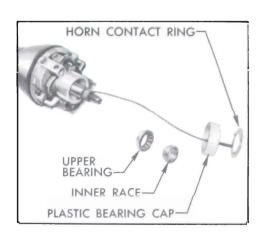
Removing Inner Race and Upper Bearing from Upper Portion of Mast Jacket
